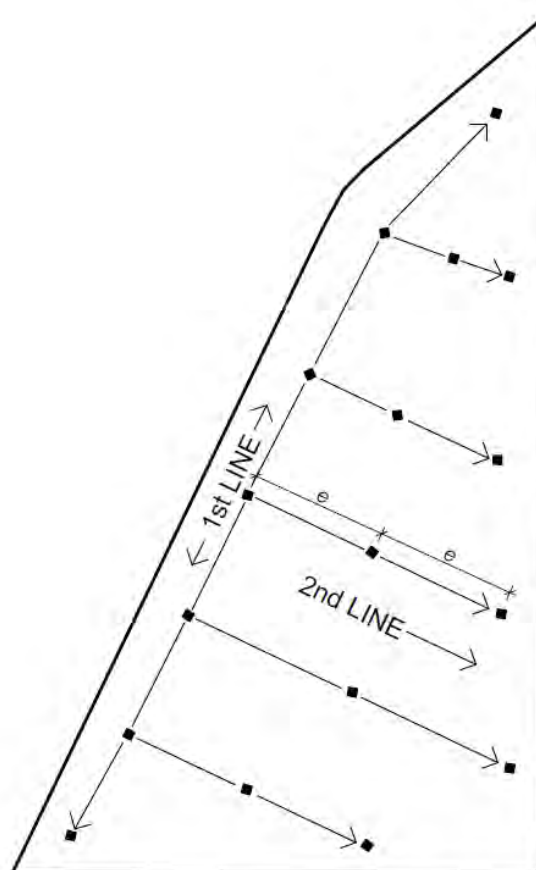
Possible outer garboard shelf on stern fastener layout plan. First line of fasteners run parallel to the rabbet line. Second run perpendicular to distribute load. Space is divided equally. (Source: Benjamin Wharton 2021).
